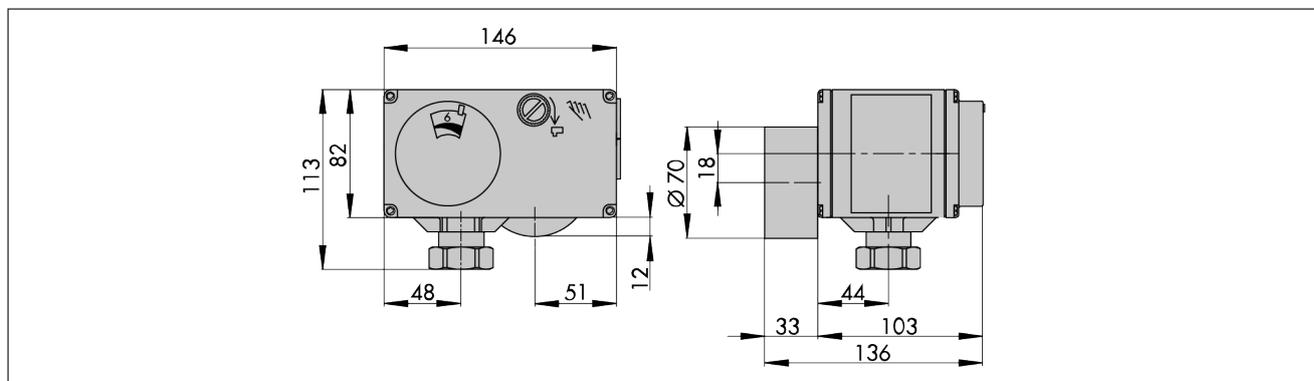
Dimensions in mm · TROVIS 5724-313/-323, TROVIS 5725-313/-323
